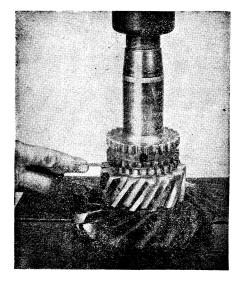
Press cross shaft and pinion into bevel gear until slight drag is felt on .015" feeler when inserted as shown
